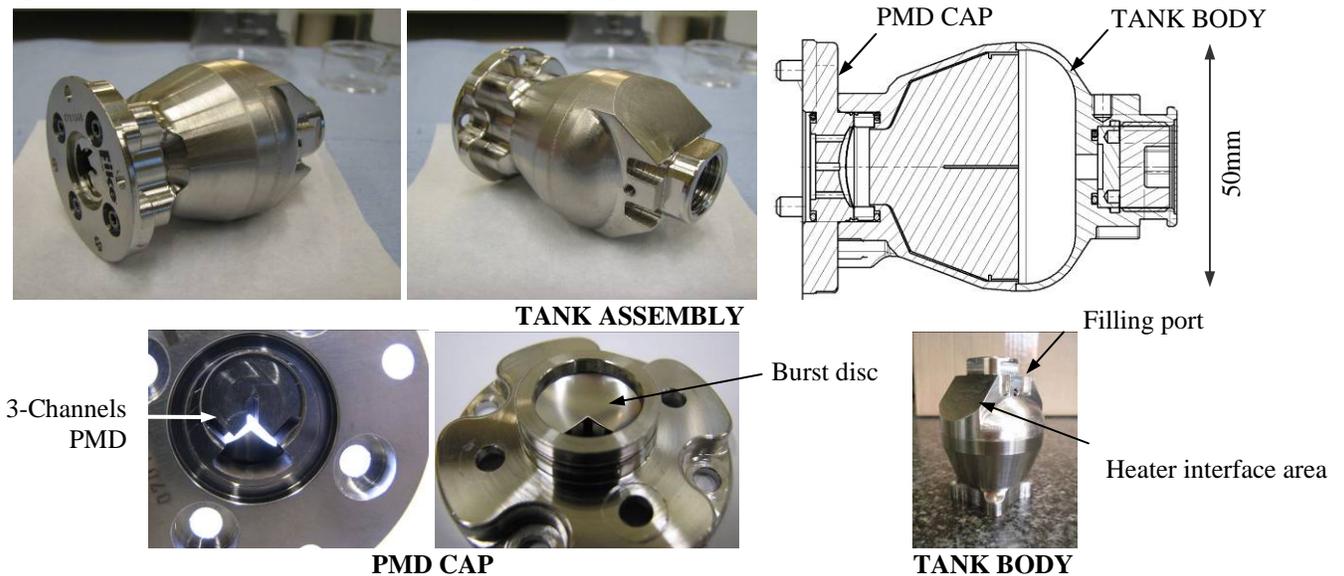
QM FEEP Tank assembly. PMD CAP and TANK BODY assembly.
